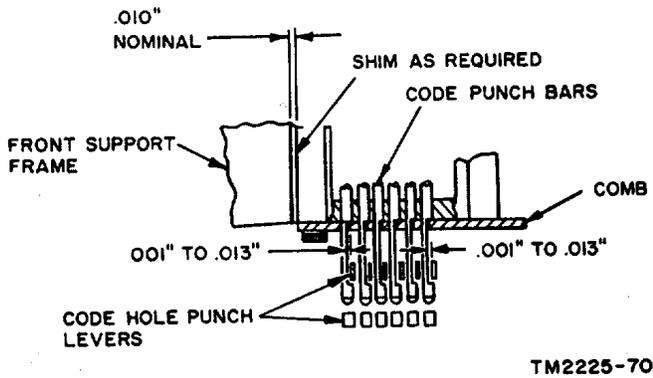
Punch interference and code hole punch levers alignment adjustment.
